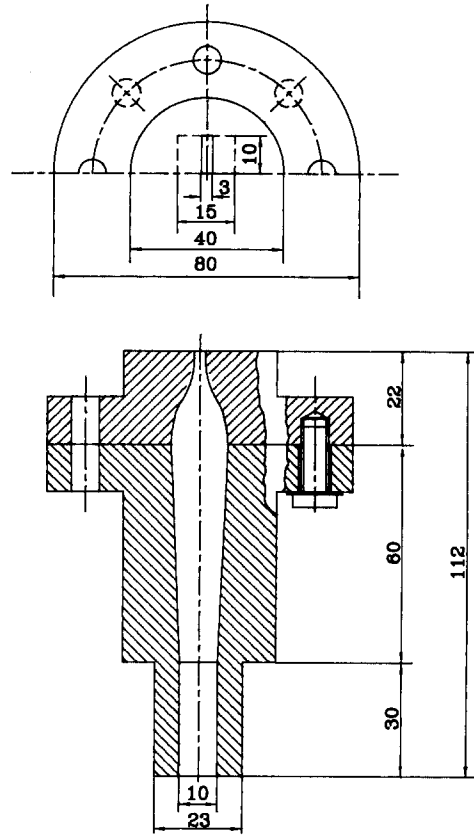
Detail drawings of rectangular nozzle and diffuser
